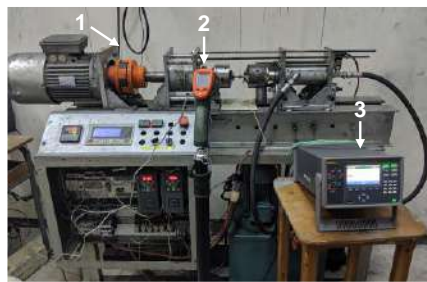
Friction welding machine and the two thermometers, 1. welding machine; 2. Infrared thermometer (remote); 3. Thermometer by touch
